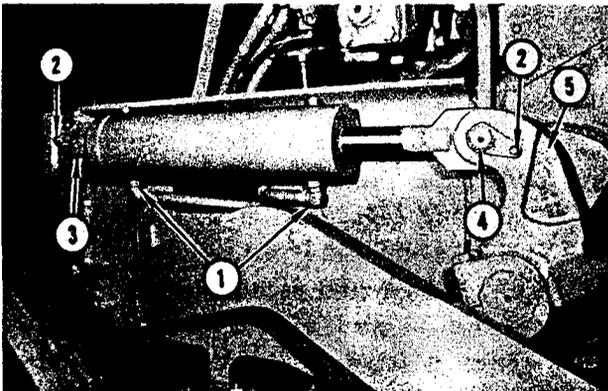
SCARIFIER CYLINDER REMOVAL
